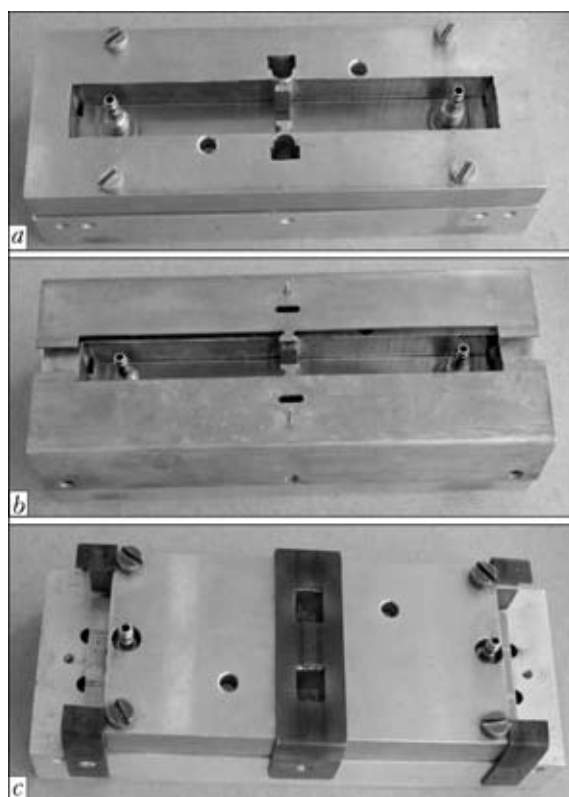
Welding-assembly device for EBW of measuring chamber ($\times 1.67$): a – assembly without shielding screens; b – assembly with shielding screens for performance of overlap welds respectively along the long and short (c) sides
